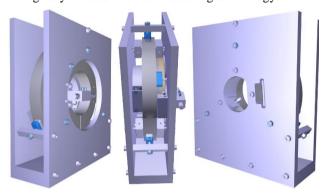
Computer assisted drawings of the test version of the sensor mount, to be standing on a table
